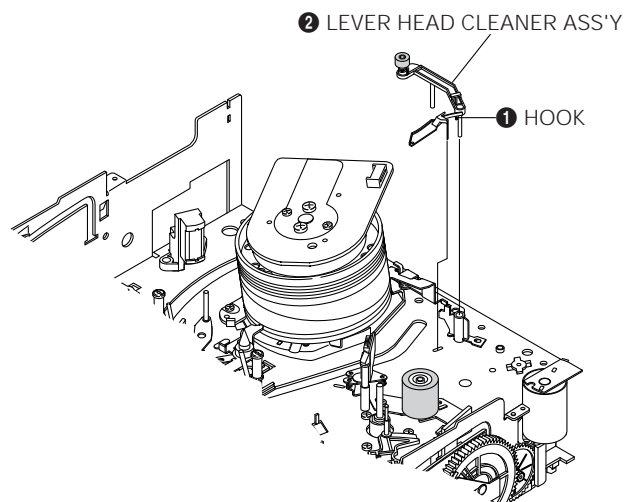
Lever Head Cleaner Ass'y Removal
